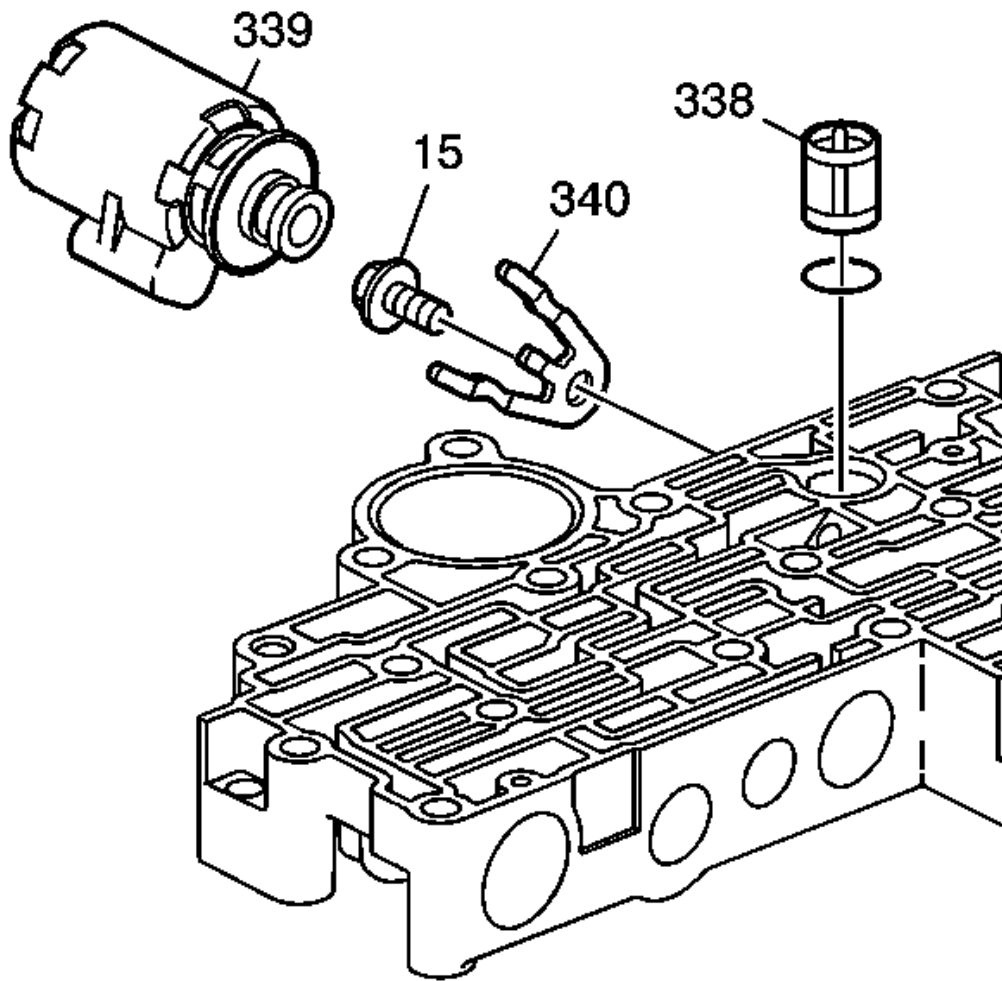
Locating Pressure Control Solenoid Filter, Valve & Seal
